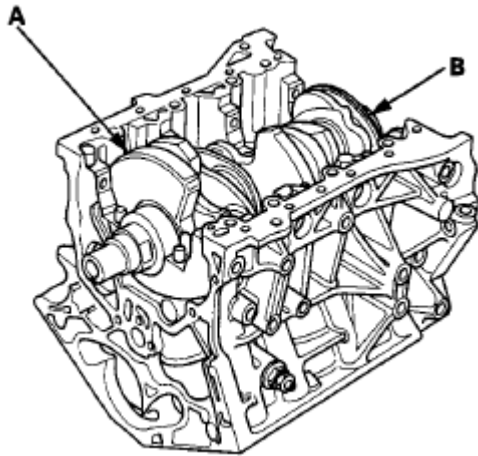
Identifying Crankshaft And CKP Pulse Plate
